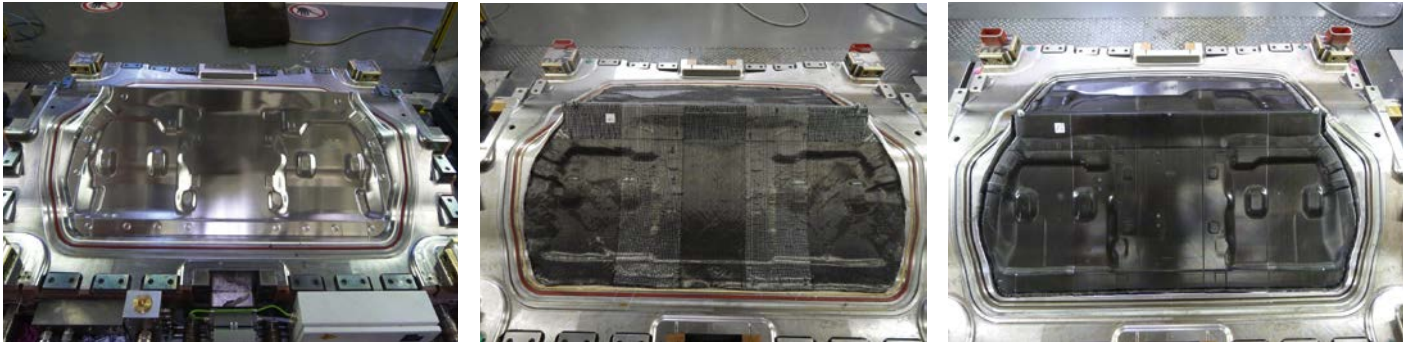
CFRP rear wall in the Ultra-RTM process. From left to right: view of the lower mold surface, mold with dry preform incorporating the reinforced load paths, cured epoxy injected part prior to demolding (© Audi)
